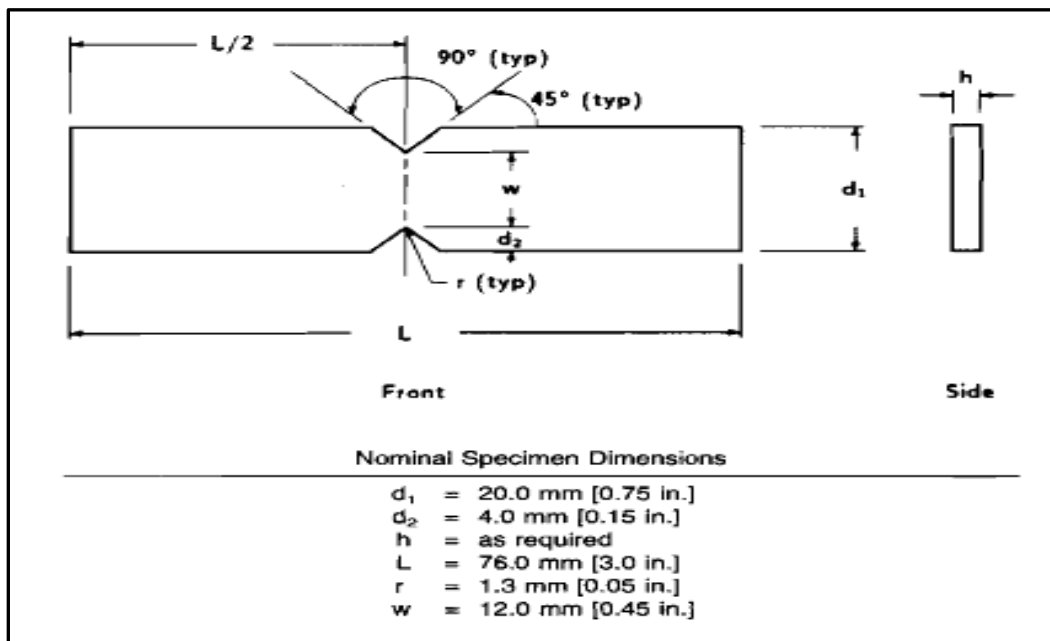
Nominal dimension for Iosipescu Interlaminar Shear Sample [ASTM D5379/D5379M-05 [112].
